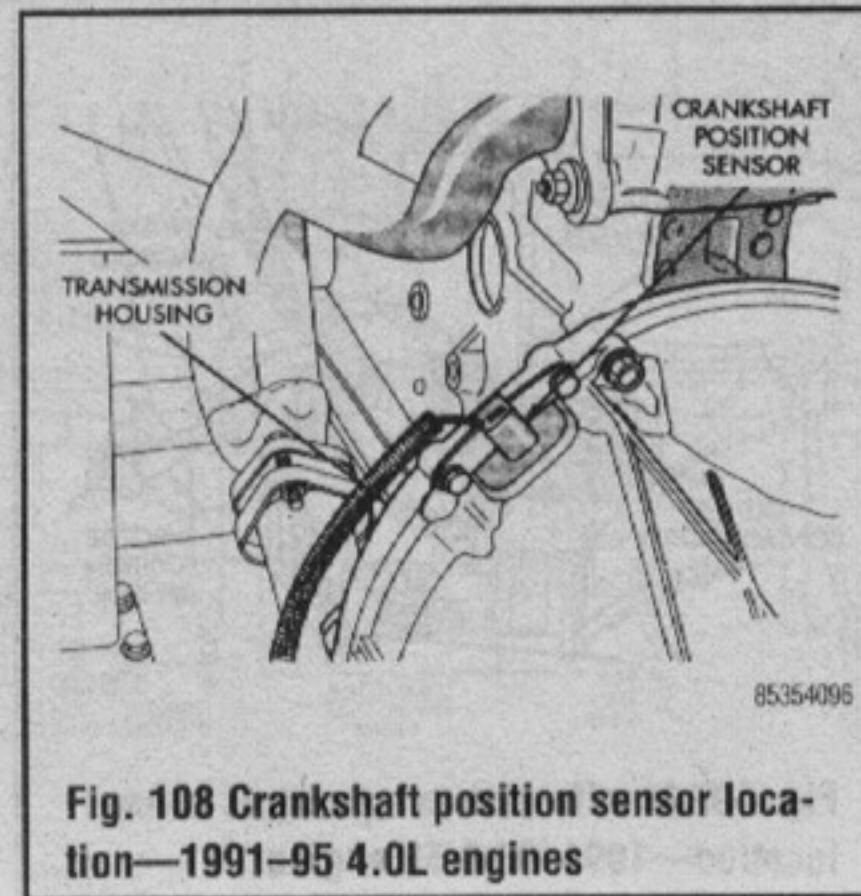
Crankshaft position sensor location—1991–95 4.0L engines
